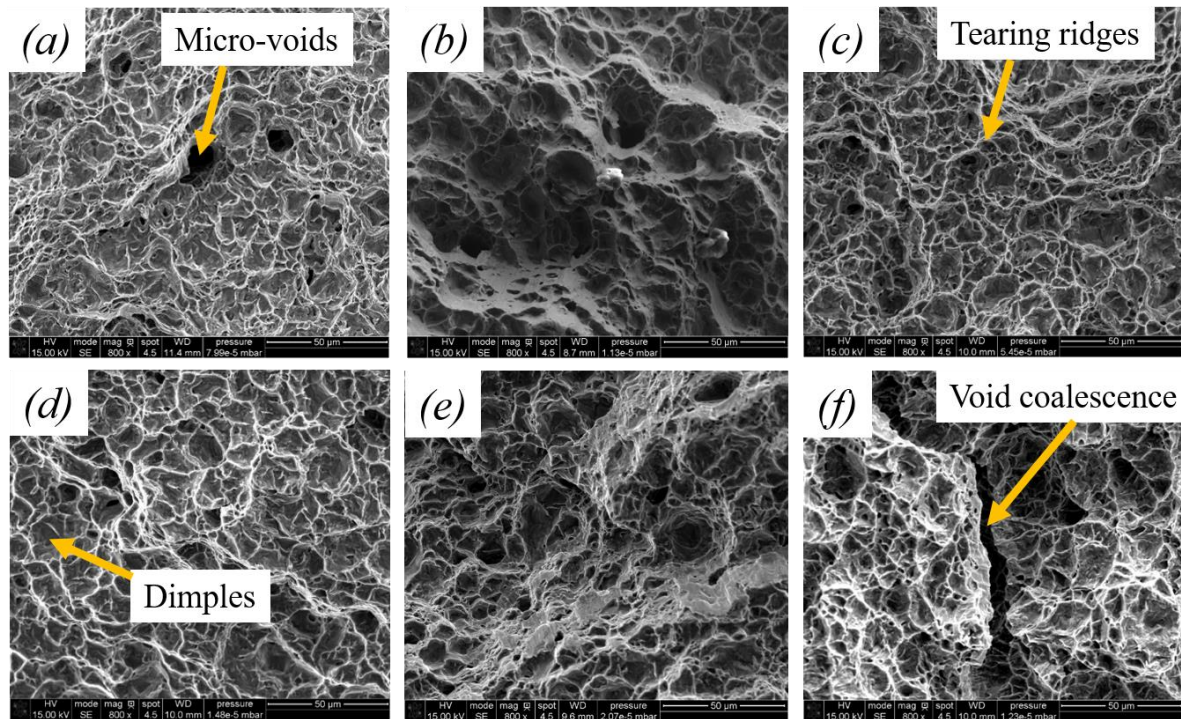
15 Fractograph of crack edges after tensile testing
